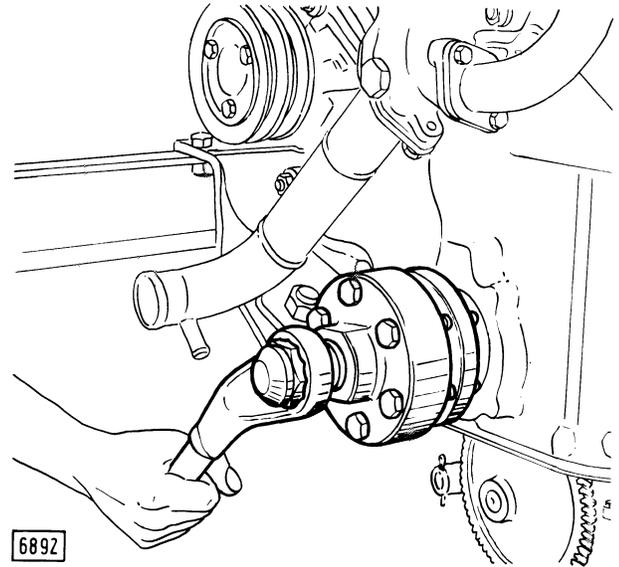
Removing crankshaft damper hub using puller 75291504.
